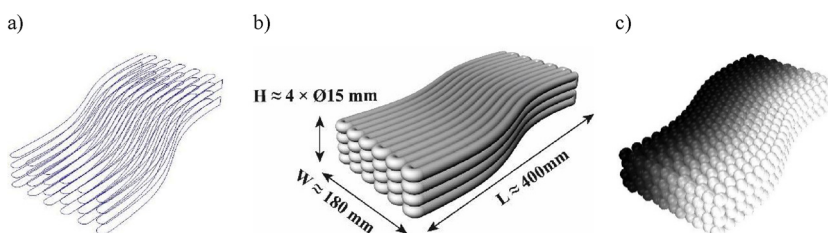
Curved block unit: a) tool path, b) CAD model showing the dimensions and the layering of filament (4 layers), c) CAD model presenting the material gradient.
